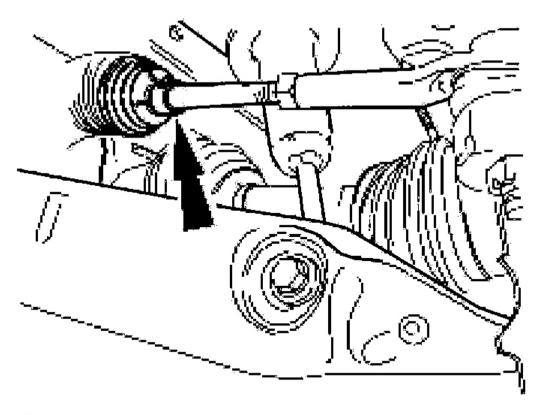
Installing Clamps Courtesy of FORD MOTOR CO.
